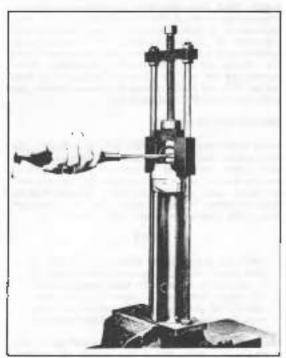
F-19. Disassembling Shock Ansorner (1986 & Bartier Shown)
